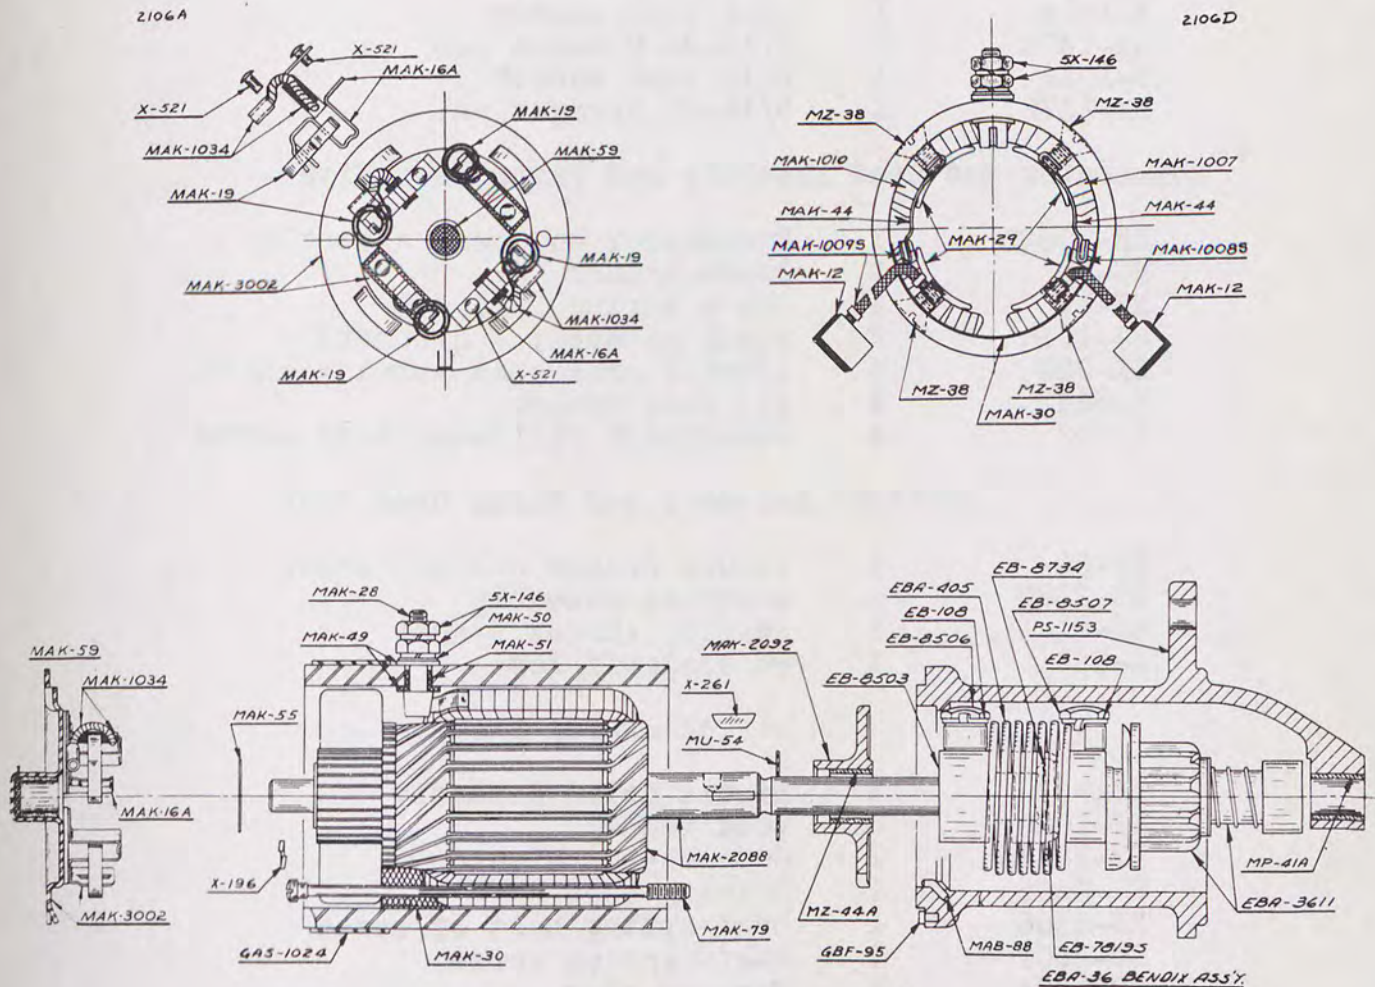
STARTING MOTOR-CROSS SECTION
